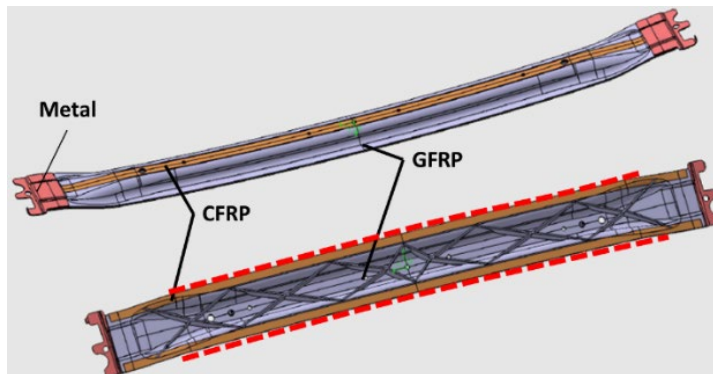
Car roof bow demonstrator after trimming to final dimension. Red lines mark the cut path on both sides of the part. CFRP stiffeners are colored brown, the GFRP body part is colored grey and the metal plates at both end in light red.
